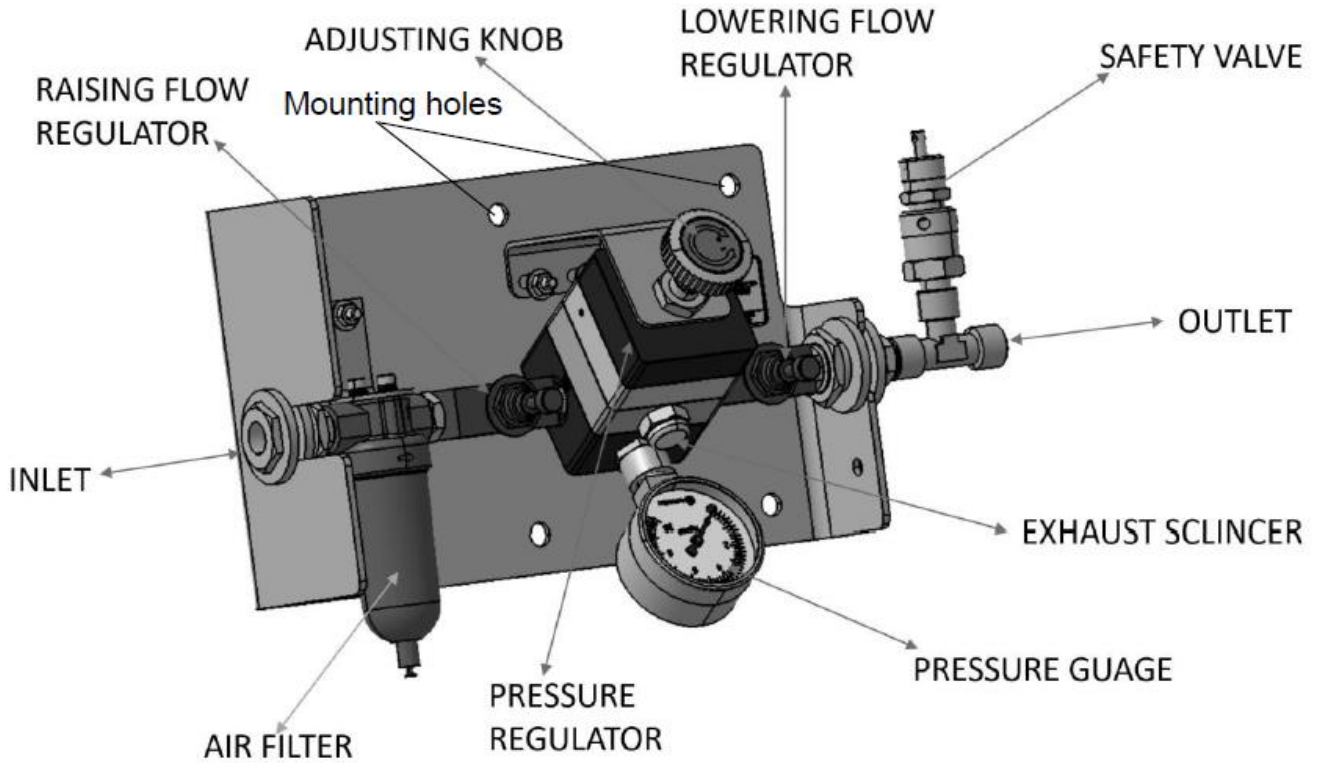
Removal and Installation of Pneumatic Control Unit (PCU)
